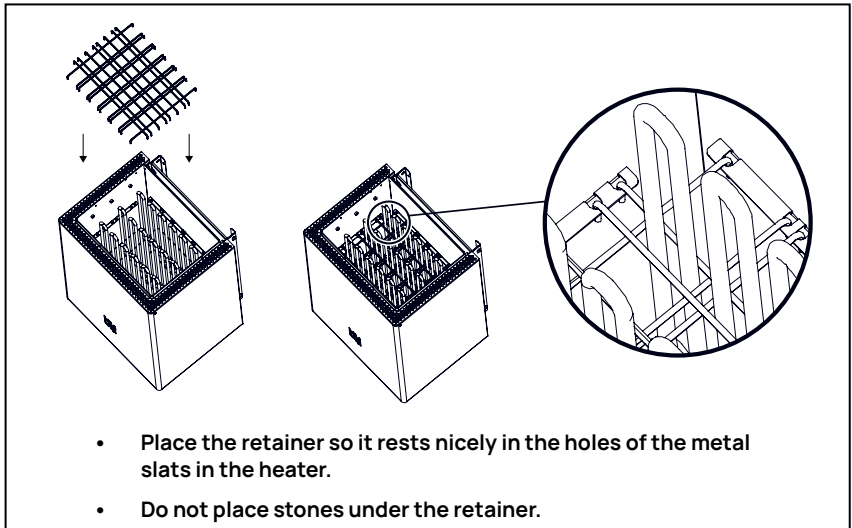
Installation of the retainer of HUUM CORE Wall and CORE Wall Combi.
